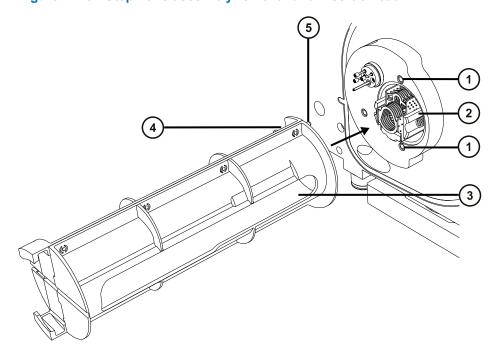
Seal breaker and locator tool positioned on the adaptor housing:
